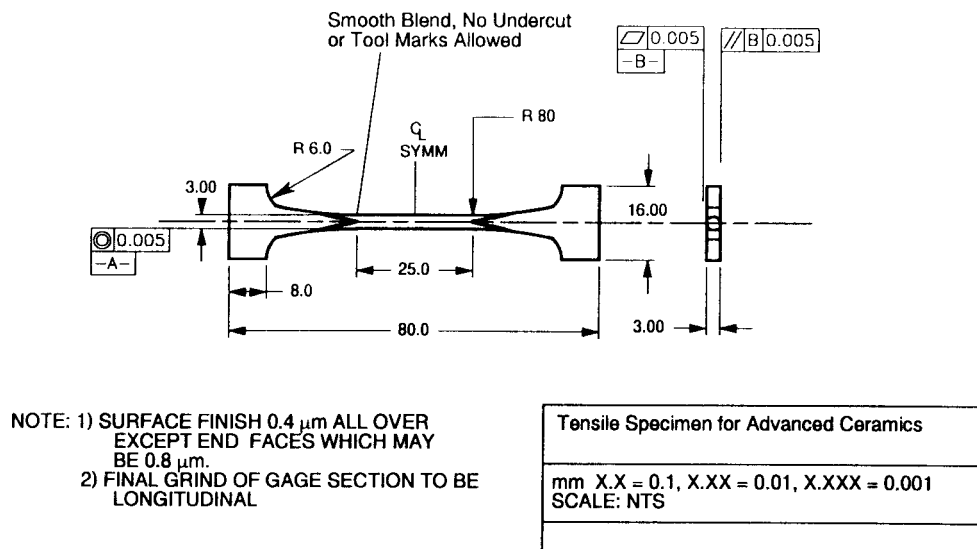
Example of a Flat, Shoulder-Loaded Tensile Specimen (4)
